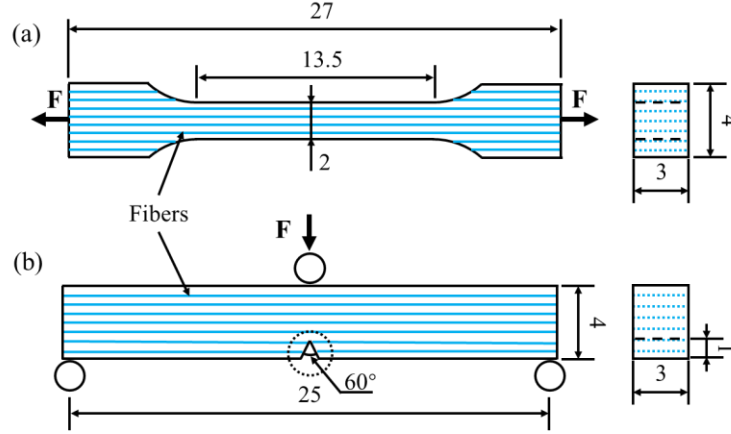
(a) Dimensions of specimen for tensile tests; (b) Dimensions of specimen for pre-notched 3-point bending tests.
